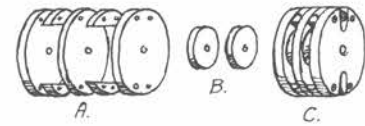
The lower block for the davit fall. A, the shell assembly; B, the sheaves; C, the assembled block prior to stropping.
